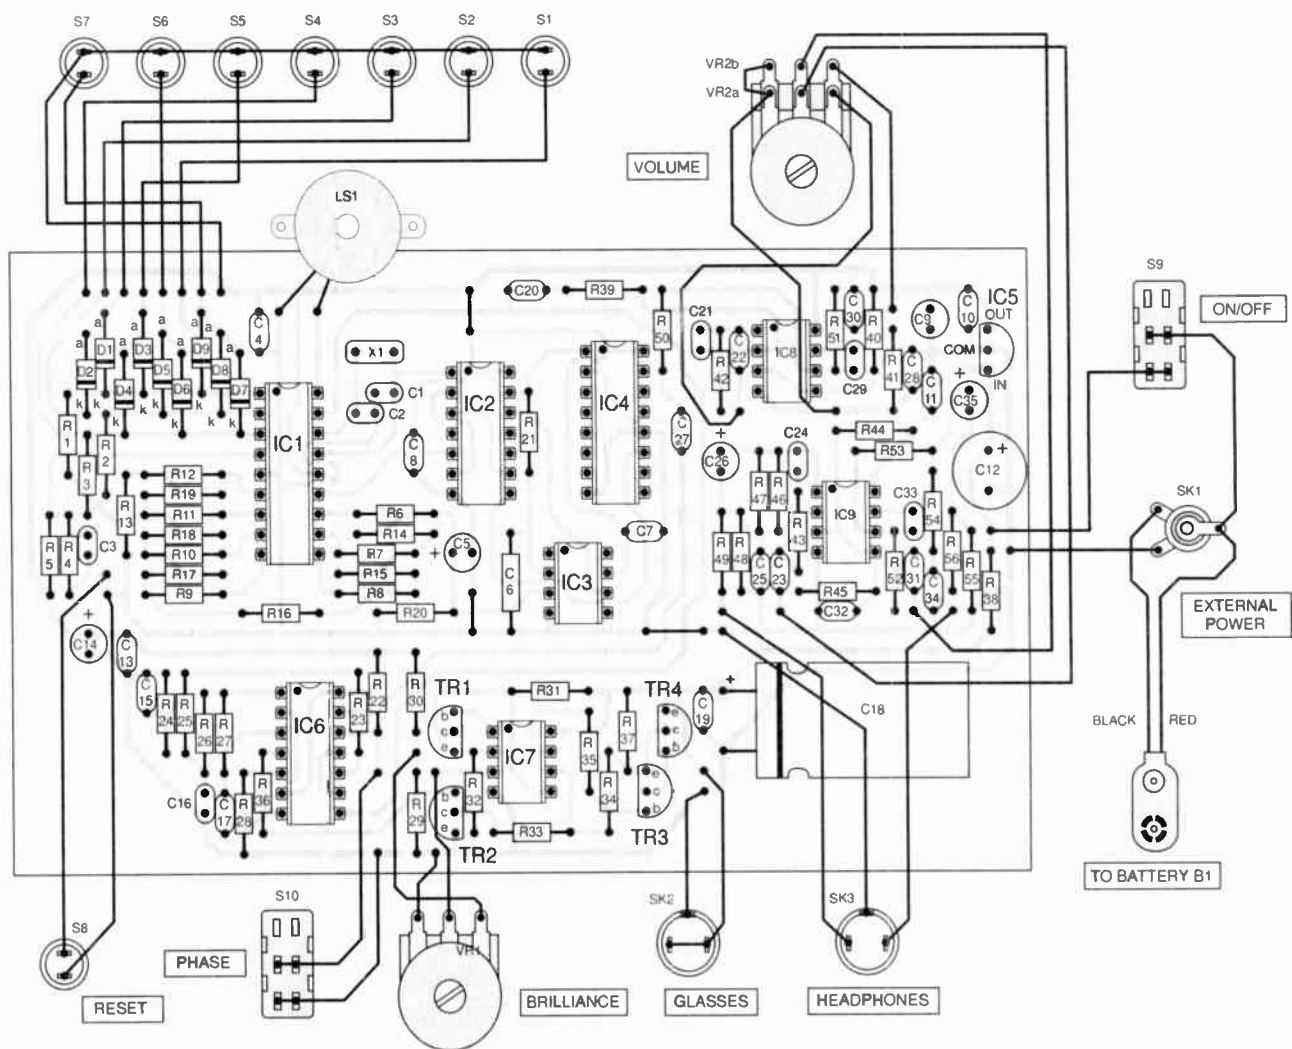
Printed circuit board component layout, wiring to off-board components and full size underside copper foil master pattern.
